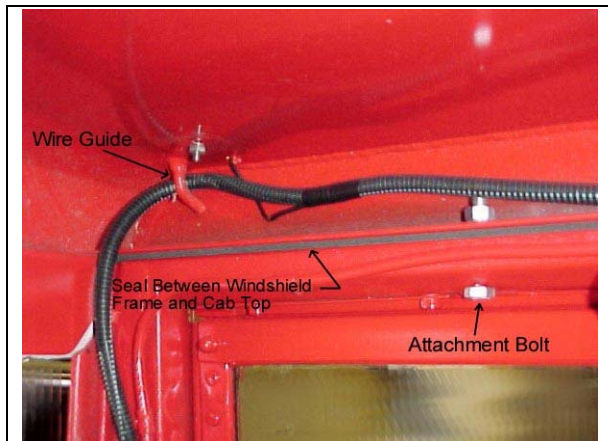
View of inside left front corner showing the seal with the windshield frame, a cab top attachment bolt, and use of the wire guide for cabling.
